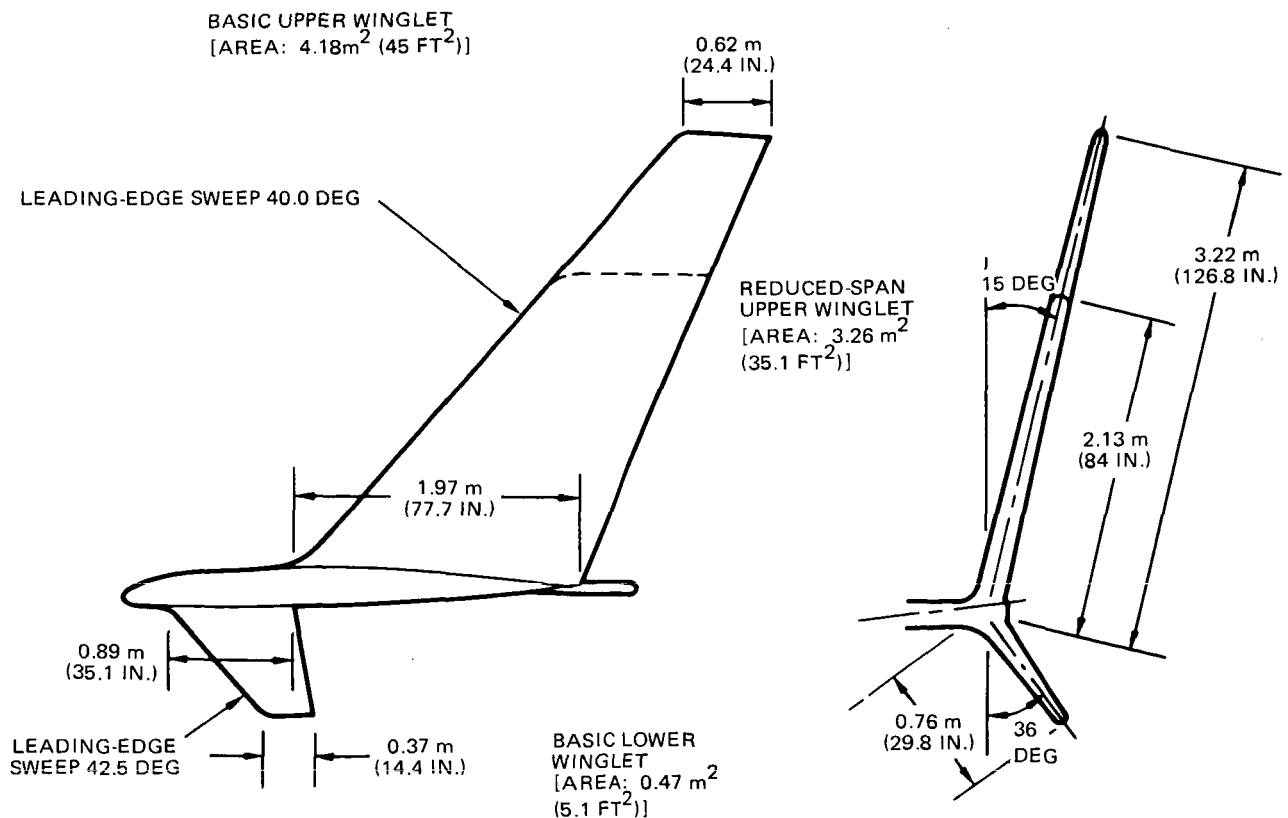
PLANNED FLIGHT TEST WINGLET GEOMETRY
